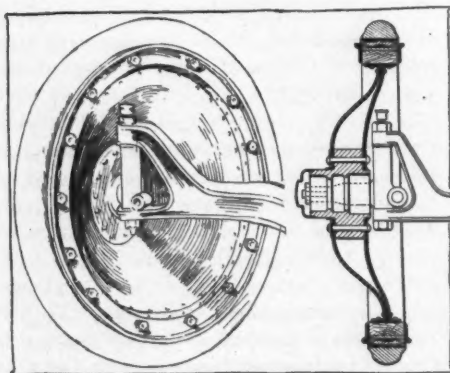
LOAFLAND CASTER FRONT WHEEL
